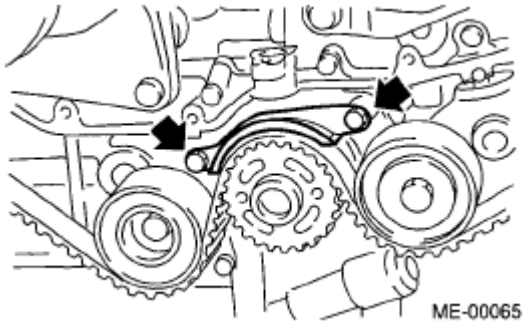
Locating Timing Belt Guide Bolt (MT Model)
